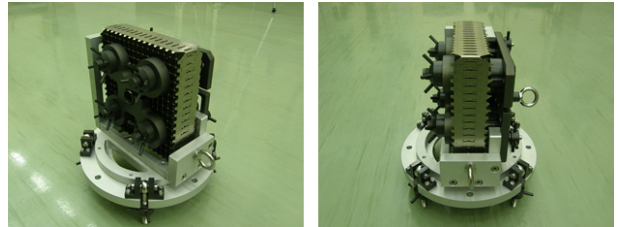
Jigs for cutting (a) tubes and (b) grids.
